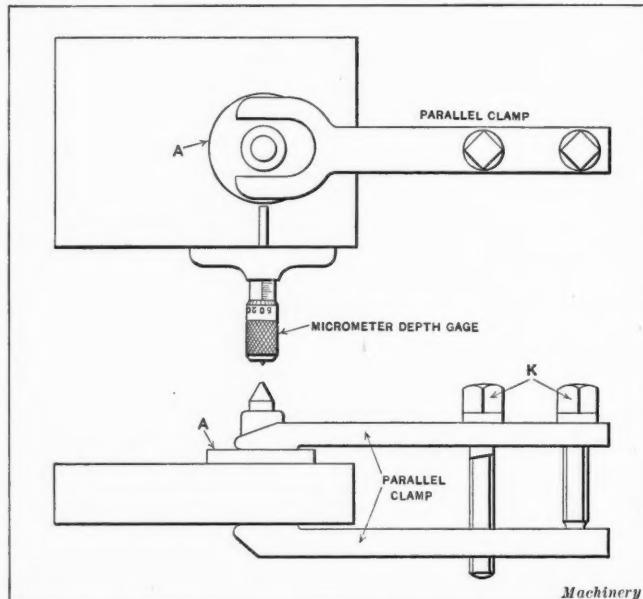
Method of locating Hole by Use of Centering Plug, Parallel Clamp and Depth Gage
